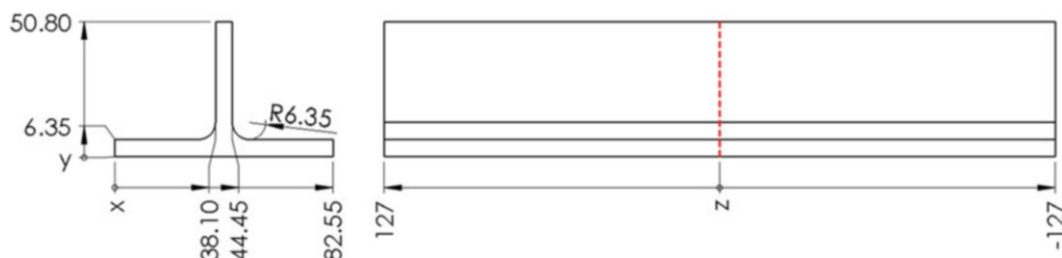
Aluminum T-section dimensions and measurement location (dimensions in mm)
